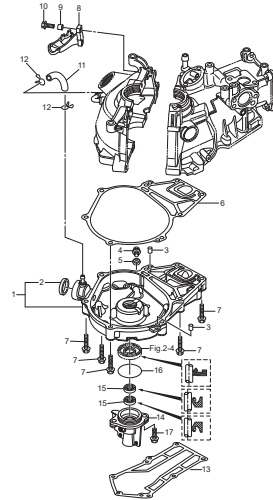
INTAKE MANIFOLD·CARBURETOR
